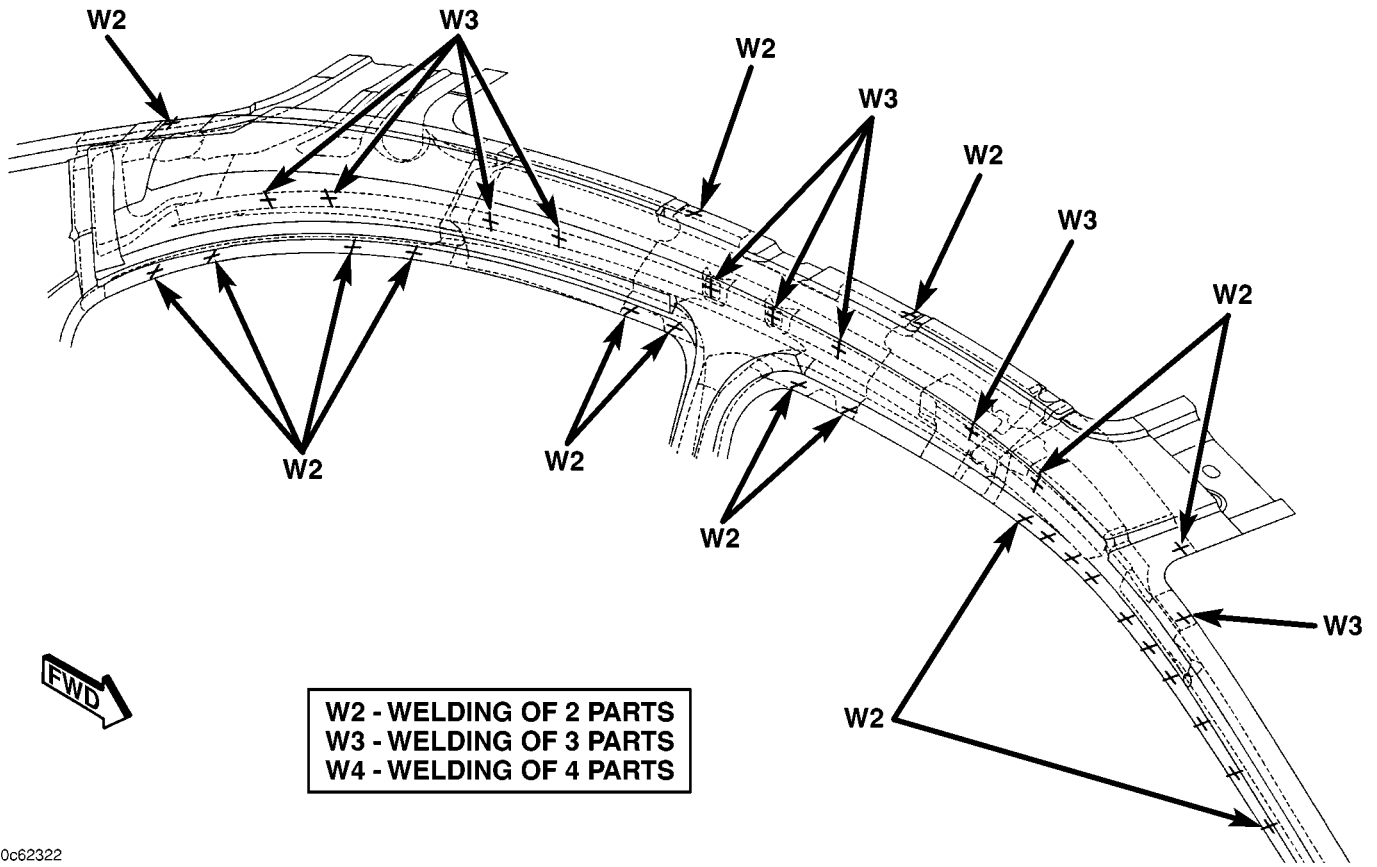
CENTER PILLAR REINFORCEMENT & SILL BEAM REINFORCEMENT TO BODY SIDE APERTURE
